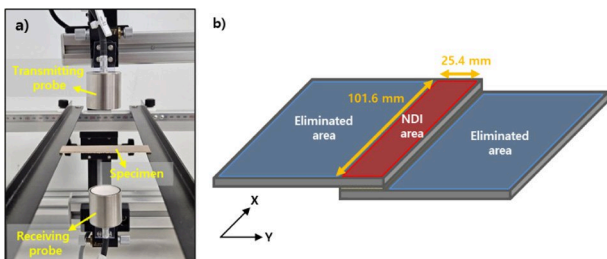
Non-destructive inspection a) setup and b) geometry of specimen
